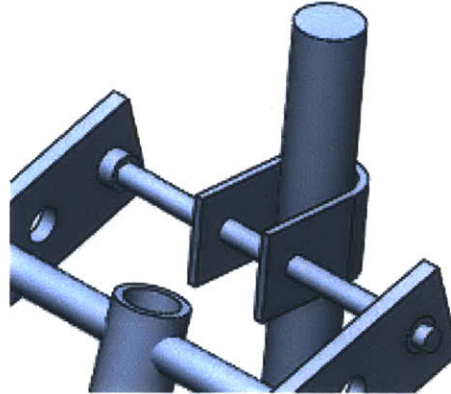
Assembled View of C Clamp. This diagram shows the C Clamp, steer tube, and top links as they would be assembled on the rickshaw's suspensions system.
